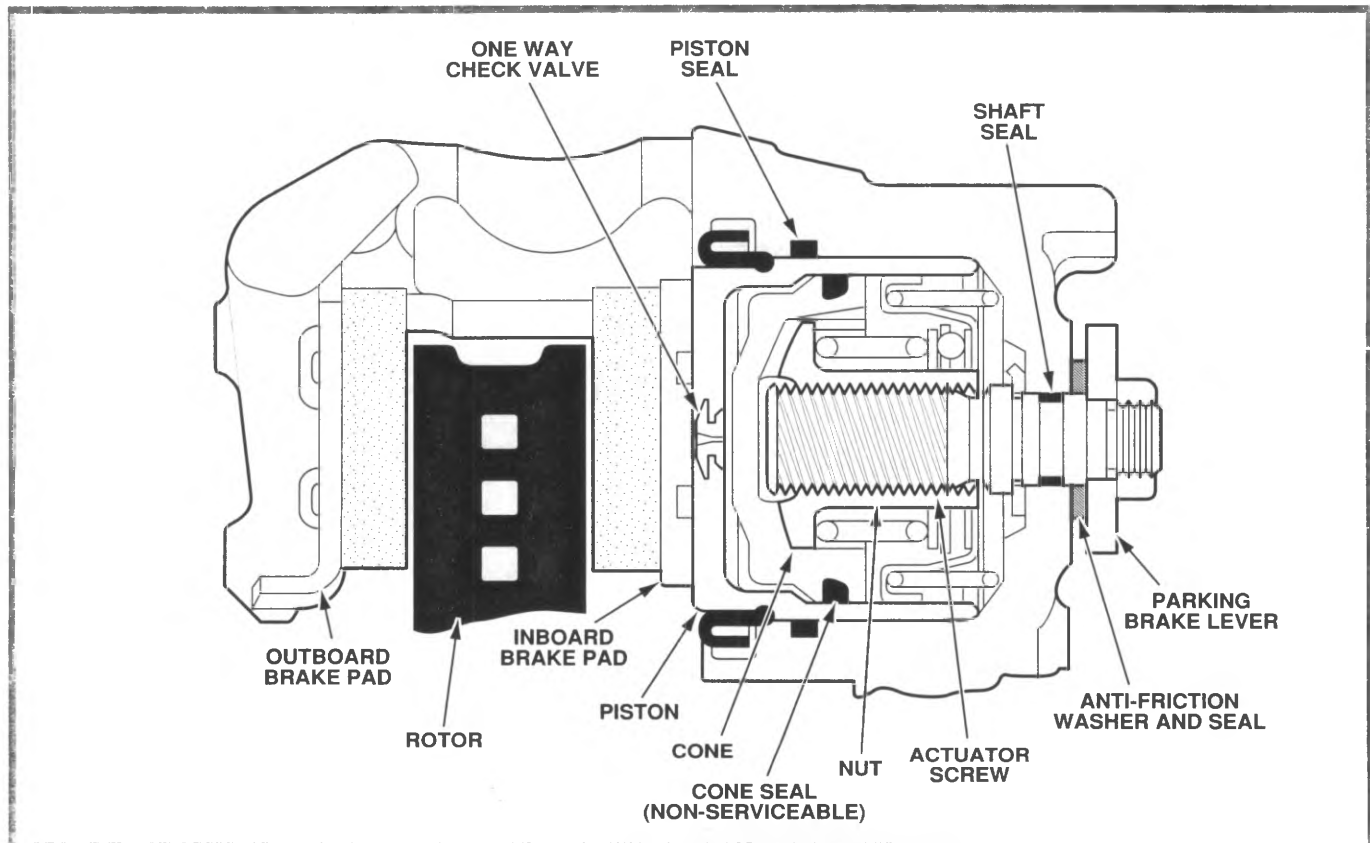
, Rear Disc Brake Caliper with Integral Parking Brake
